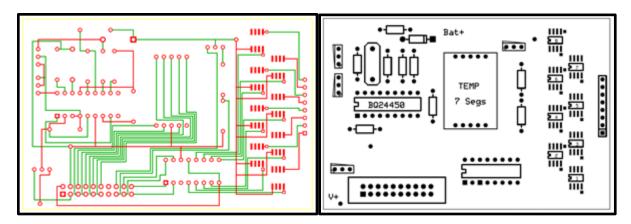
Initial PCB Design Copper Layer (left) & Screen-print with Through-pads (right)
